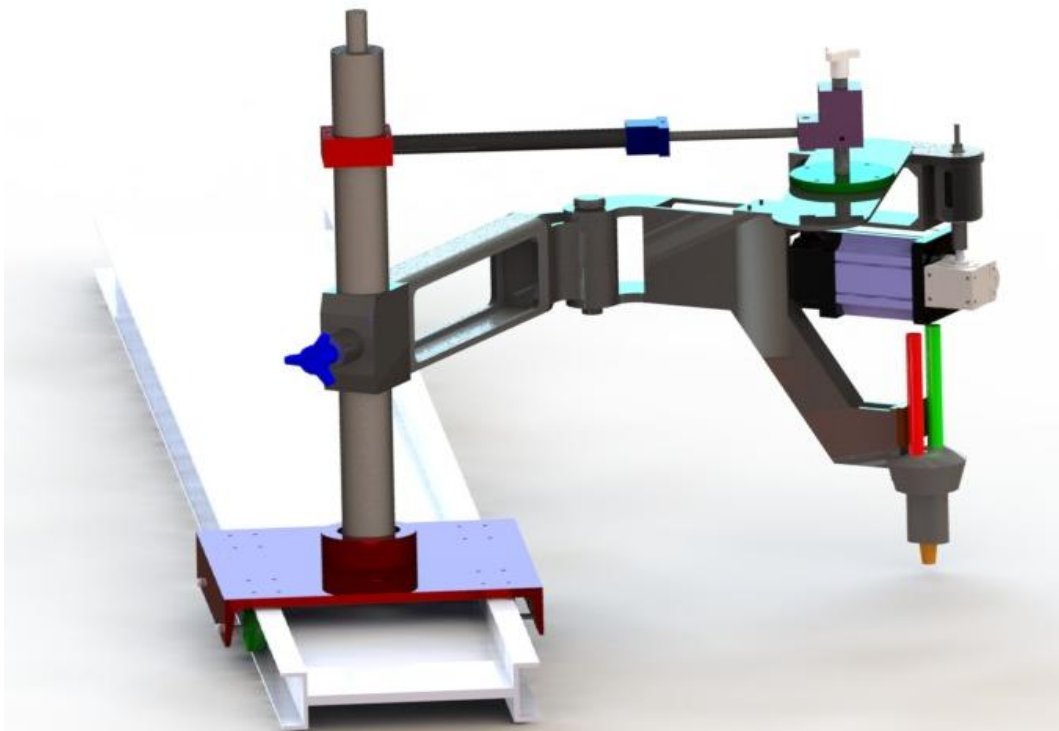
Intermediate Design of the Pug Profile Cutting Machine
